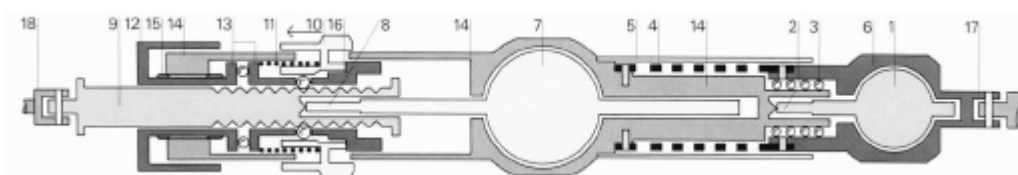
Scheme of a distometer: 1 Dial gauge to measure the spring extension; 2 Transducer; 3 Axial ball bearing; 4 Precision steel spring; 5 Protective tube; 6 Connection between dial gauge and precision steel spring; 7 Dial gauge for length measurement; 8 Transducer; 9 Drag-bar with notches for coarse movements; 10 Ring to release the notch; 11 Pressure spring to press the ring 10 at the notch 16; 12 Turning ring for fine adjustment of drag-bar; 13 Ball bearing; 14 Instrument body; 15 Clamping nut; 16 Notch; 17, 18 Couplings
